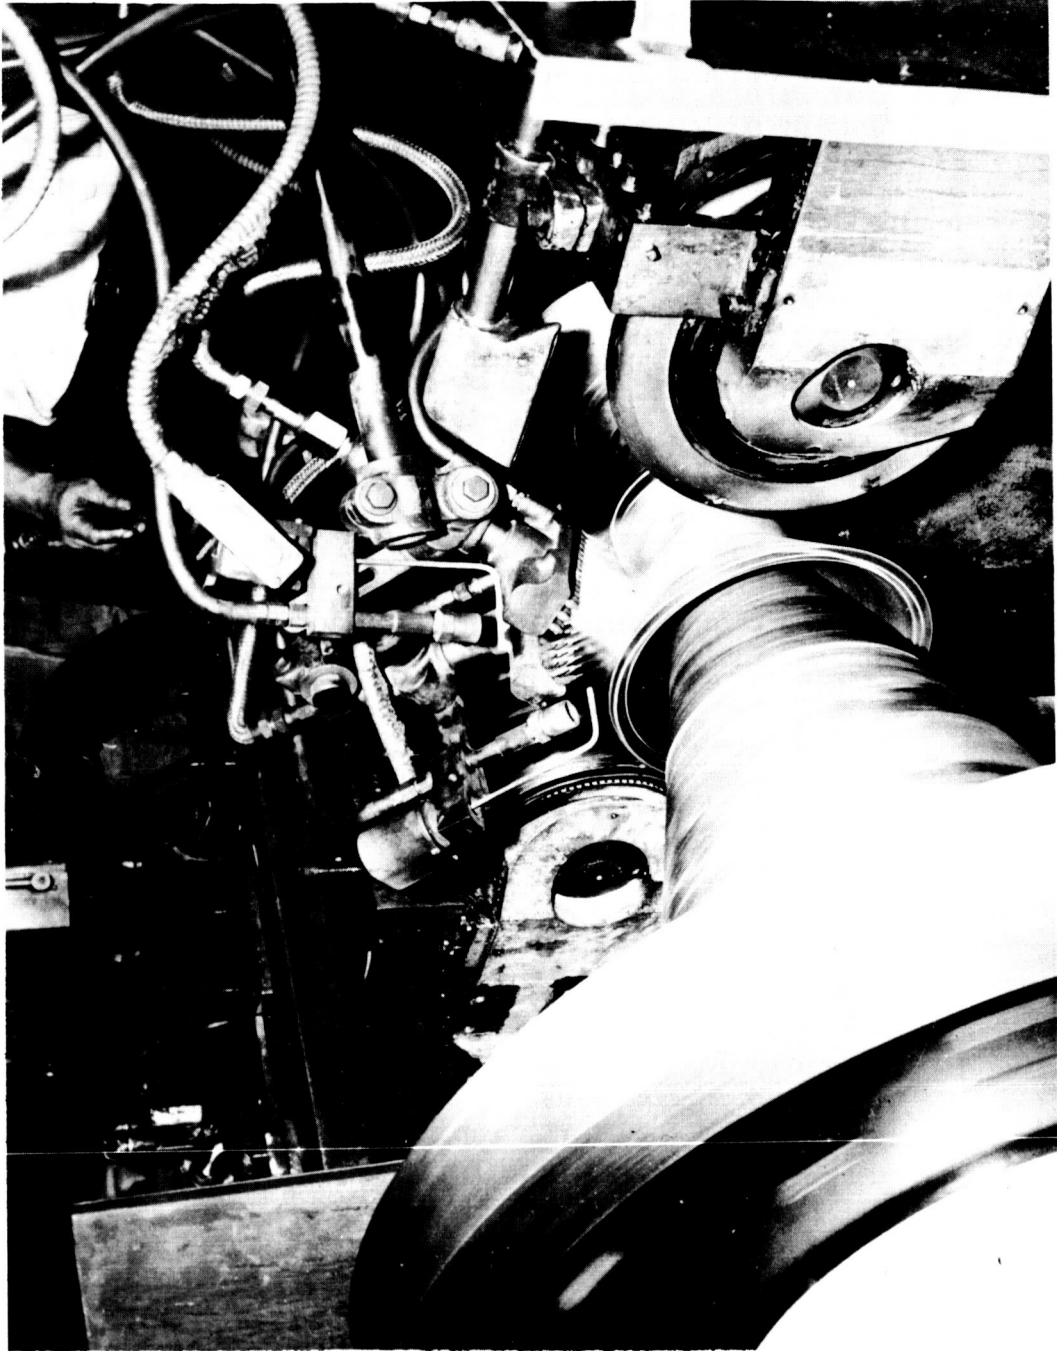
TORCH HEATING OF A BLANK DURING CONE SHEAR FORMING (REF. 88)
